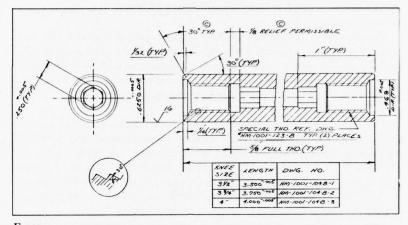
Knee bolt. The shop drawing reproduced here also carried notes as follows: 1. Both threads and o.d. must be concentric within .005 T.I.R., and coaxial with each other and square with bolt ends within .002 in. per in. 2. Remove all burrs. The material was noted to be 5/8 o.d. 3/16-wall seamless steel tube.
